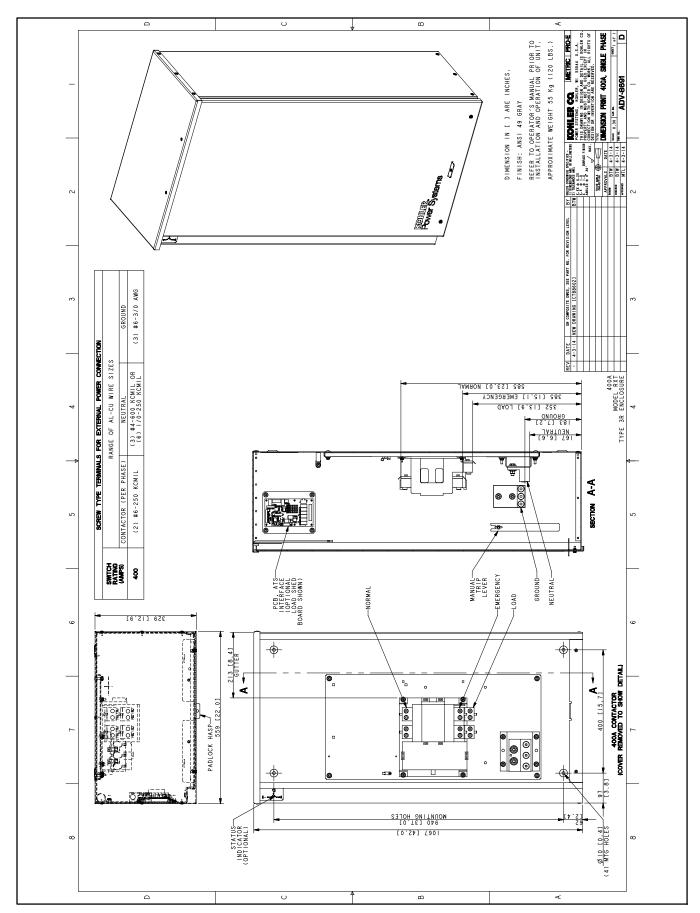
Enclosure Dimensions, 400 Amp Single-Phase, ADV-8691
